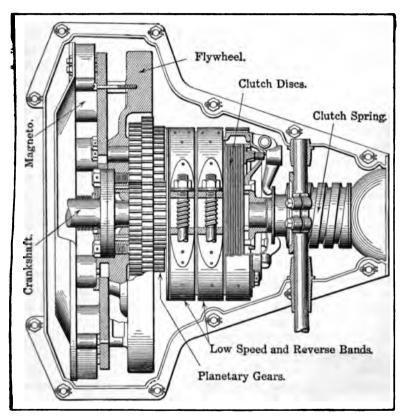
Top View of Two Speed and Reverse Planetary Gear Employed on Ford Cars.
